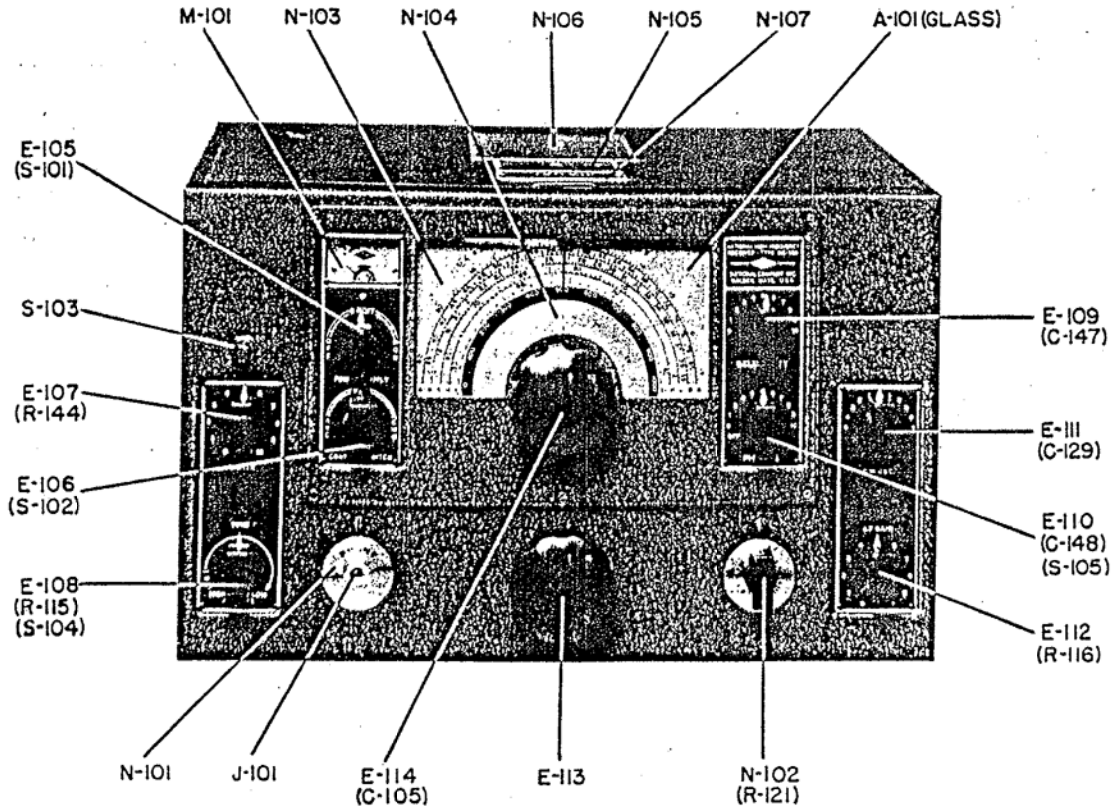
FRONT VIEW OF RECEIVER
